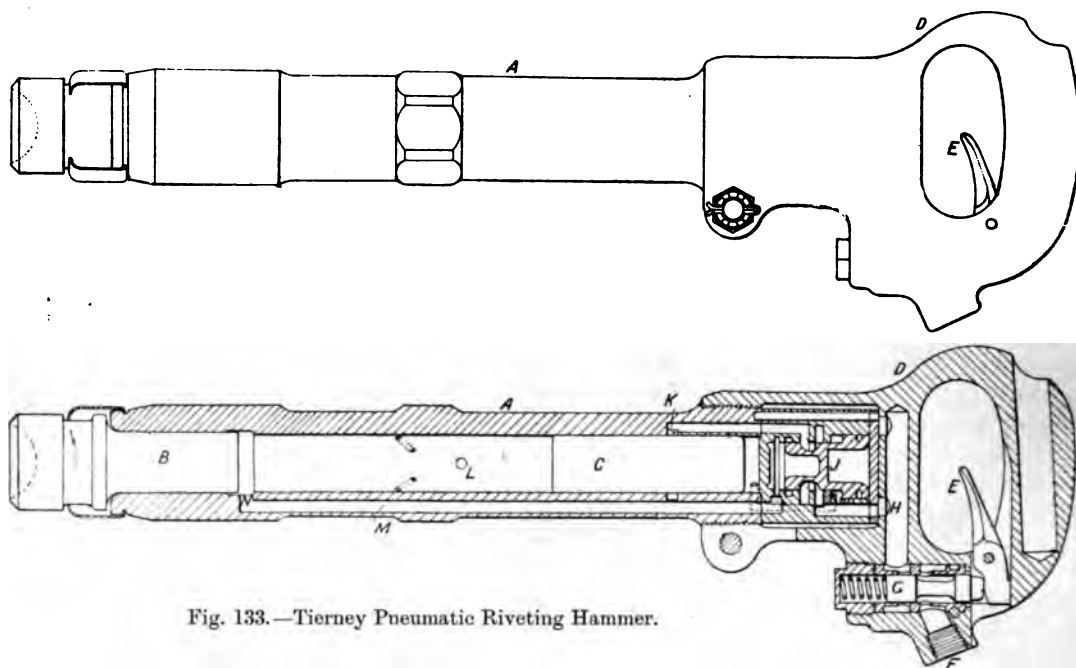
Tierney Pneumatic Riveting Hammer.
